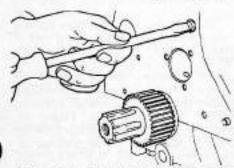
View showing removal of oil supply restricter for timing gears. Clean with compressed air and reinstall.
